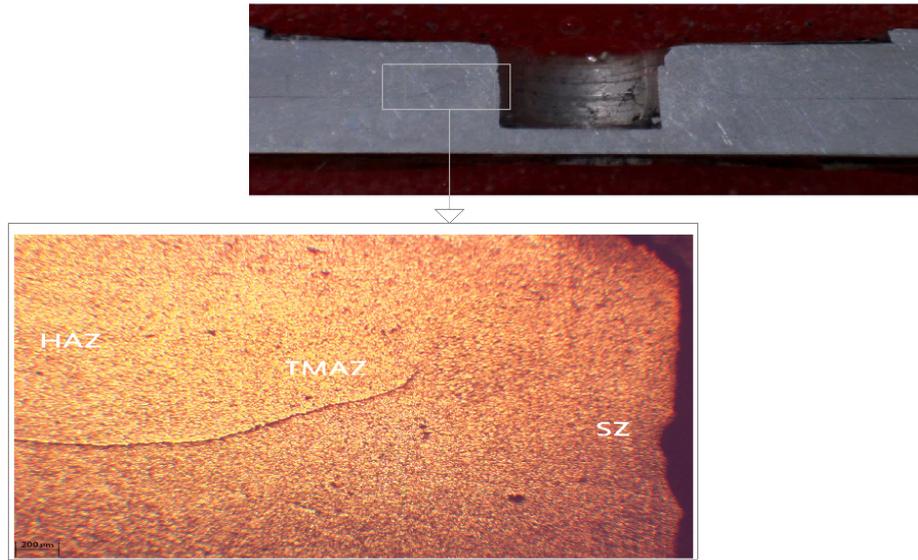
Macro- and microstructures of a friction stir spot weld made using triangular pin 1000-rpm tool rotational speed.
